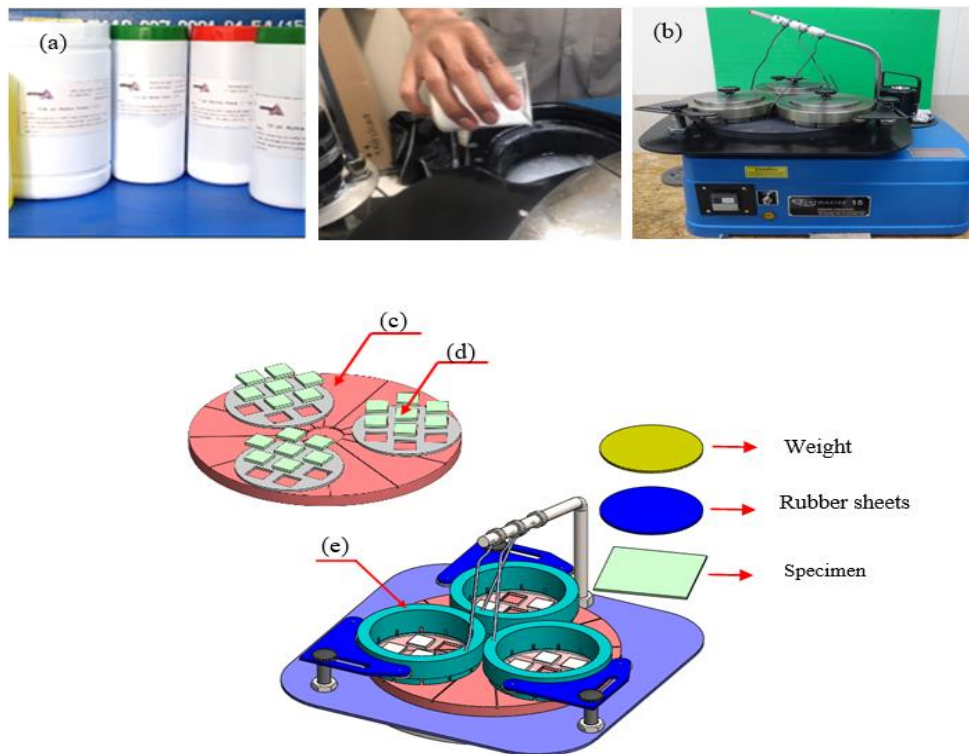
(a) Alumina (b) Lapping Machine (c) Polishing Plate (d) Specimen (e) Conditioning Rings
